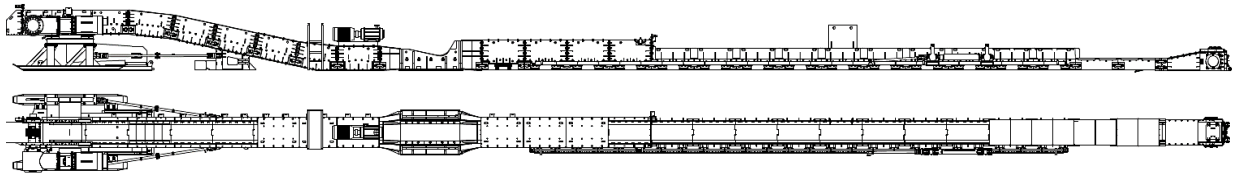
A sketch of light-duty scraper conveyor [12, 13]
